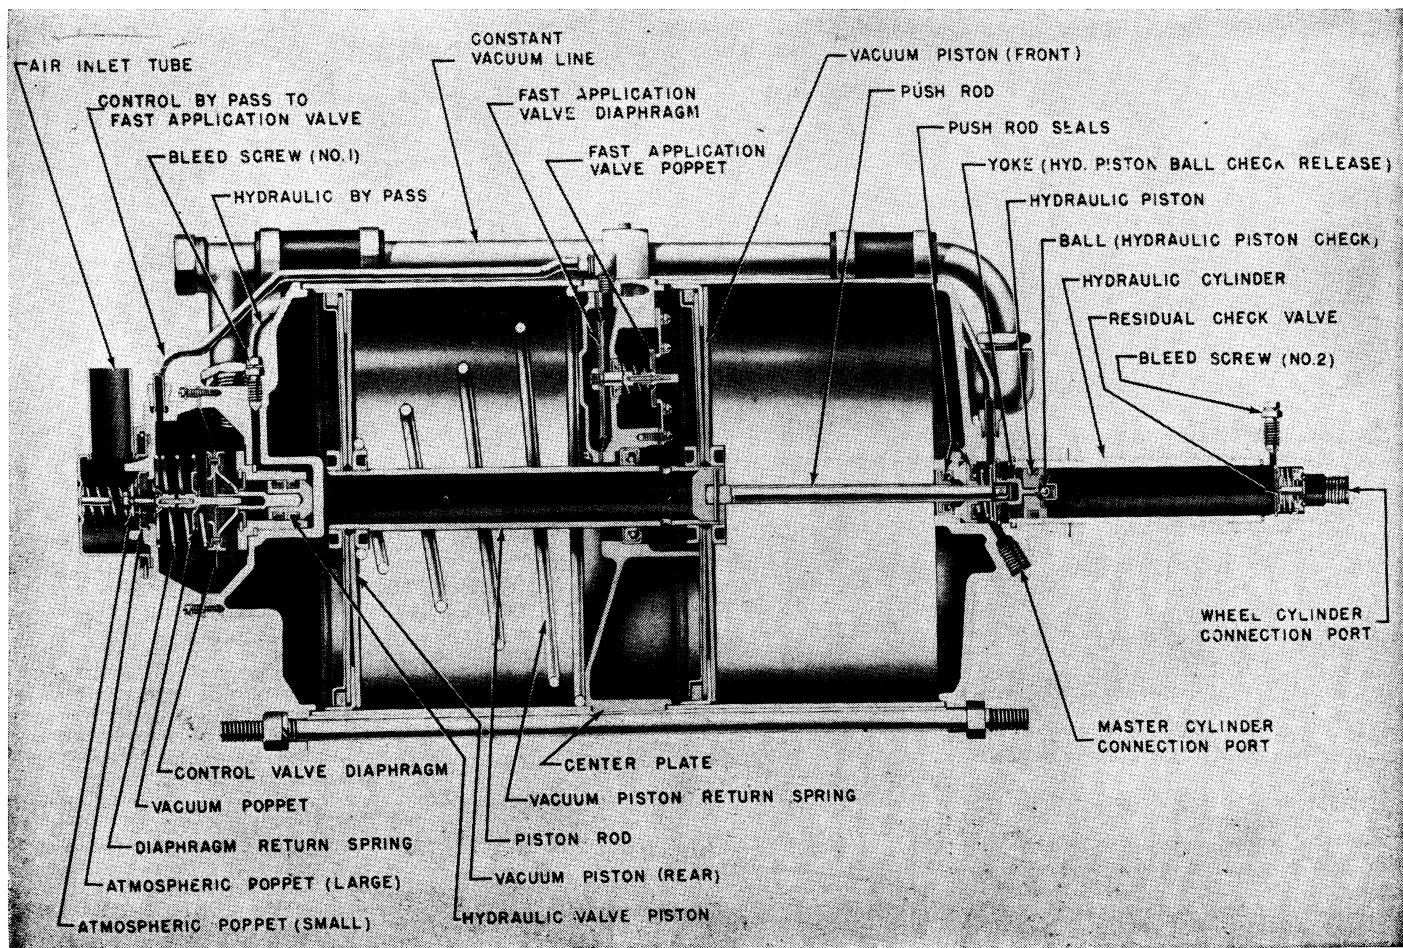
Sectional view of Third Series Hydrovac with tandem piston
